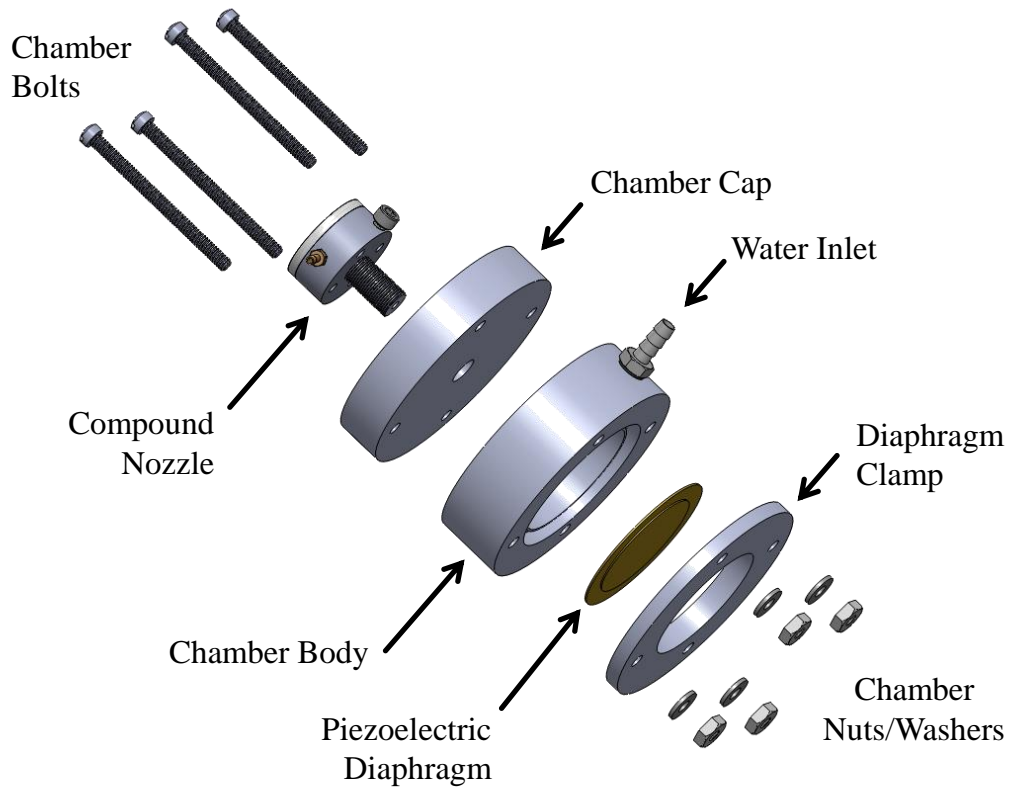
An exploded view, rendered in SolidWorks, of the droplet generator assembly. The chamber bolts compress the chamber cap, chamber body, and diaphragm clamp securing the piezoelectric diaphragm against an O-ring gasket (not shown). Water fills the chamber through the water inlet and the compound droplet is threaded through the hole in the chamber cap.
